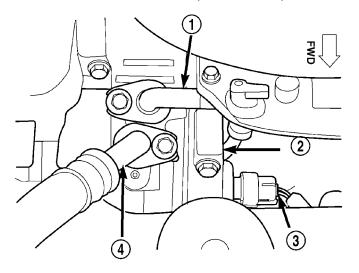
A/C Compressor Removal/Installation 2.4L Turbo
